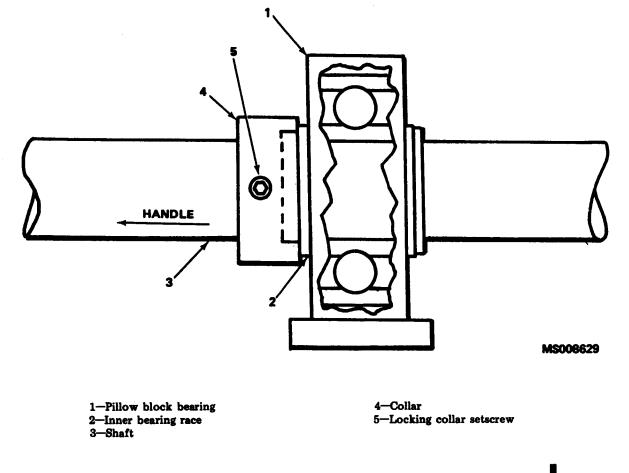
Mating of pivot shaft (10286285) to pillow block bearing (10286311).
